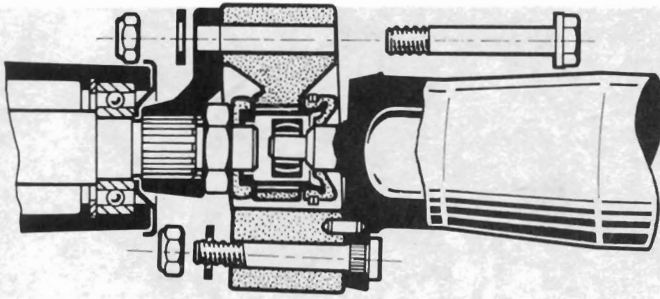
Propeller shaft rear joint (Sec 1)
